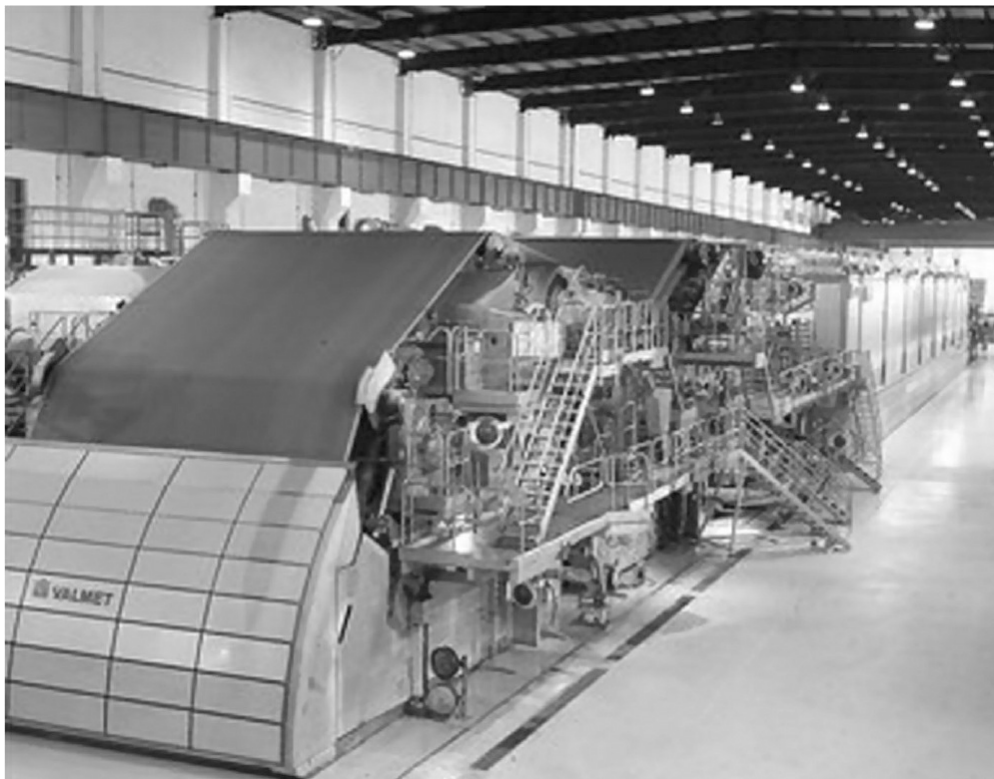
A modern Fourdrinier paper machine. (*Photo courtesy of VALMET.*)
